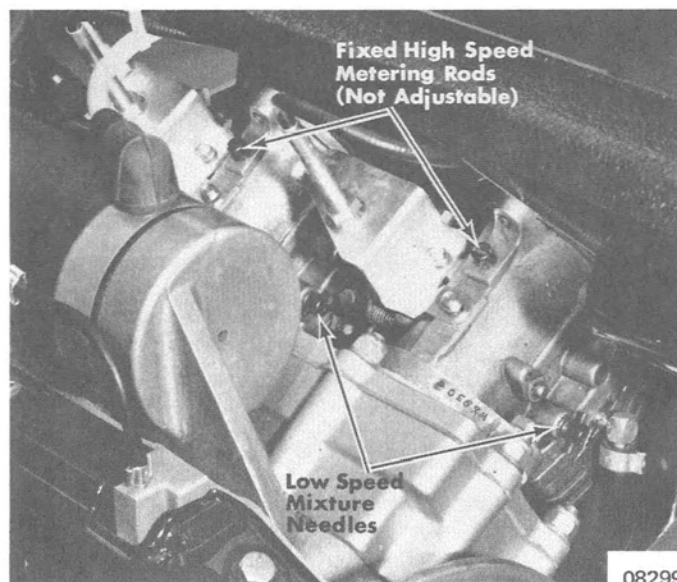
Carburetor Adjustments - Mark II Model with Chassis Serial No. 3787640 and Above
